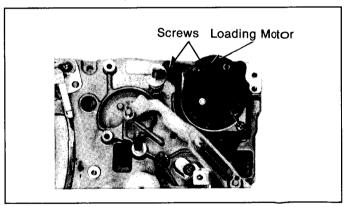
Assembly and Adjustment of Gears and Rod-(7)
